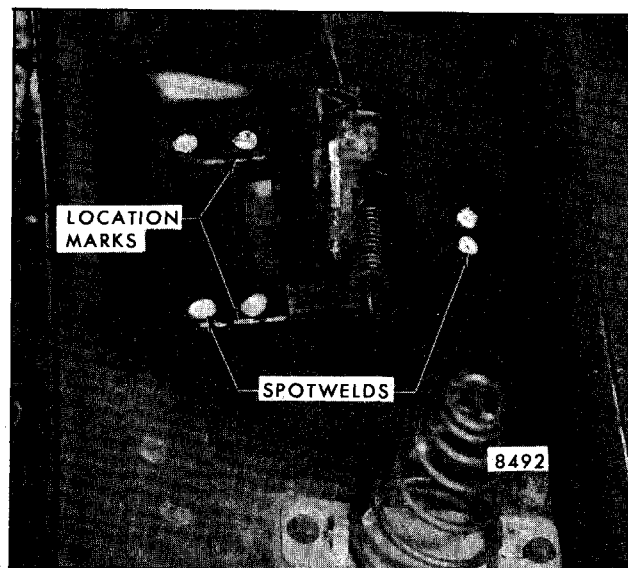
Hood Latch Assembly - "H-11, 15 and 77"
